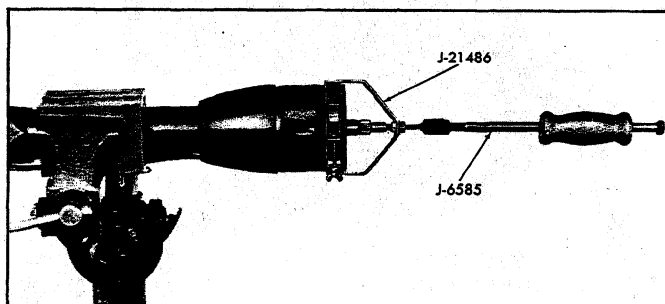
Removing Turn Signal Cover Using Tools J-21486 and J-6585-1
